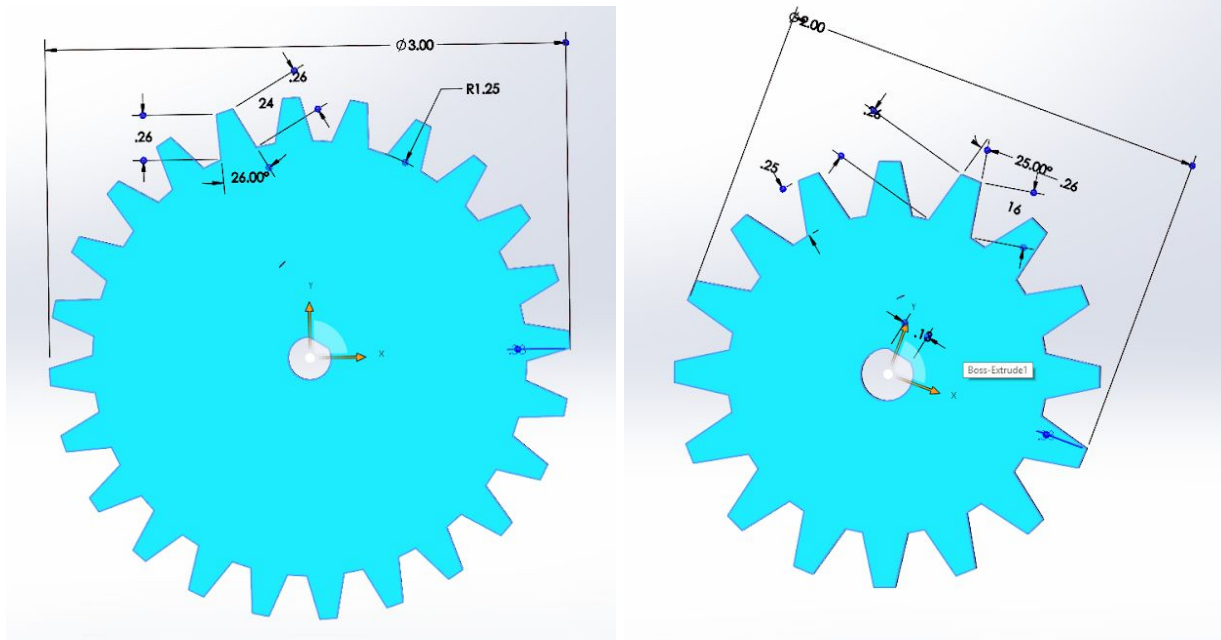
SolidWorks of the two gears with corresponding dimensions.
